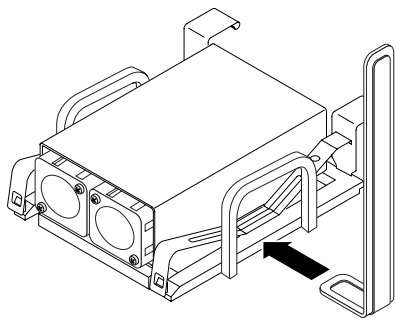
Inserting the Heat Sink Removal Tool
